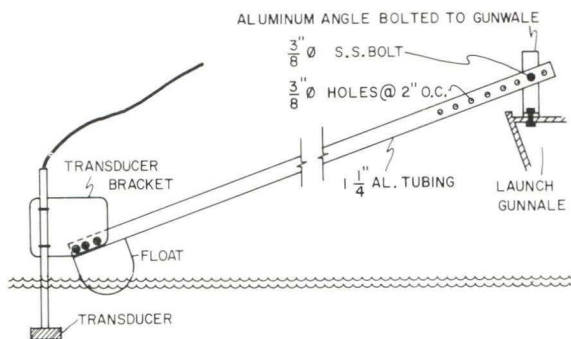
OUTRIGGER MOUNTING ASSEMBLY
